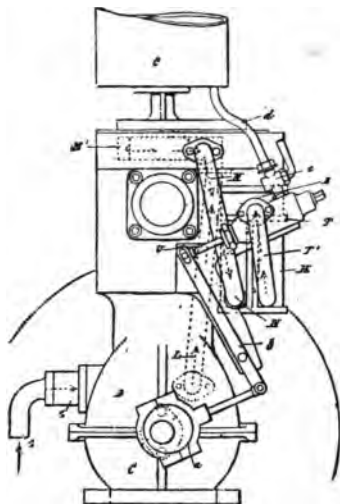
Roots' Petroleum or Explosive Engine (Elevation).
